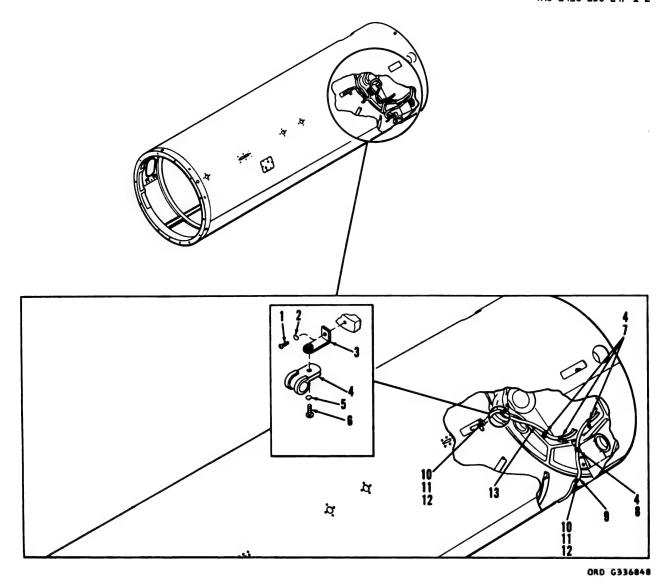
EQUIPMENT INSTALLATION. ENGINE SECTION /9028467/
